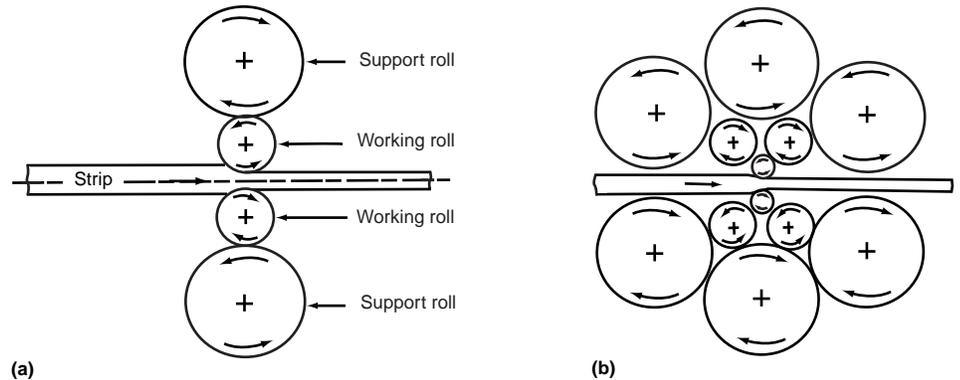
Typical roll arrangements for precision cold rolling of copper sheet and strip. (a) Four-high mill. (b) Cluster mill
